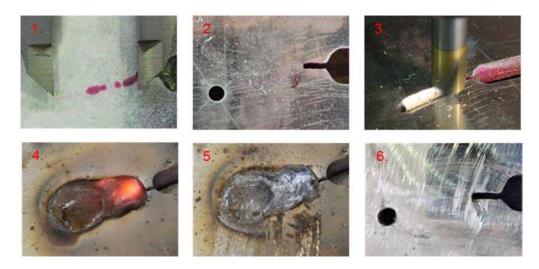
Preparation of the CT-specimen "welding 02" for the second test phase; 1. dye penetrant inspection; 2. drilling of the crack tip; 3. removal of the damaged metal; 4. repair welding; 5. removal of slag; 6. grind of welding seam elevation.
